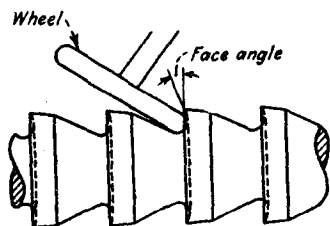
Wheel plane is set a greater angle than the face angle of the broach tooth, in order to avoid reducing the face angle when sharpening.
